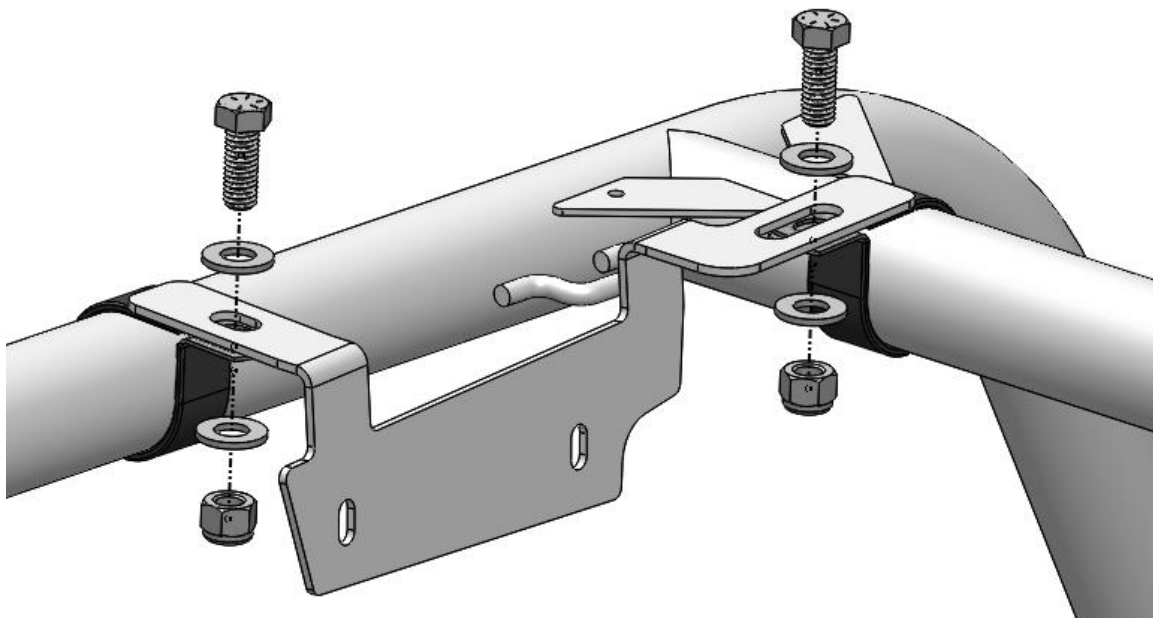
Mount the bracket to the loop clamps. Driver side shown. (Passenger side similar)
